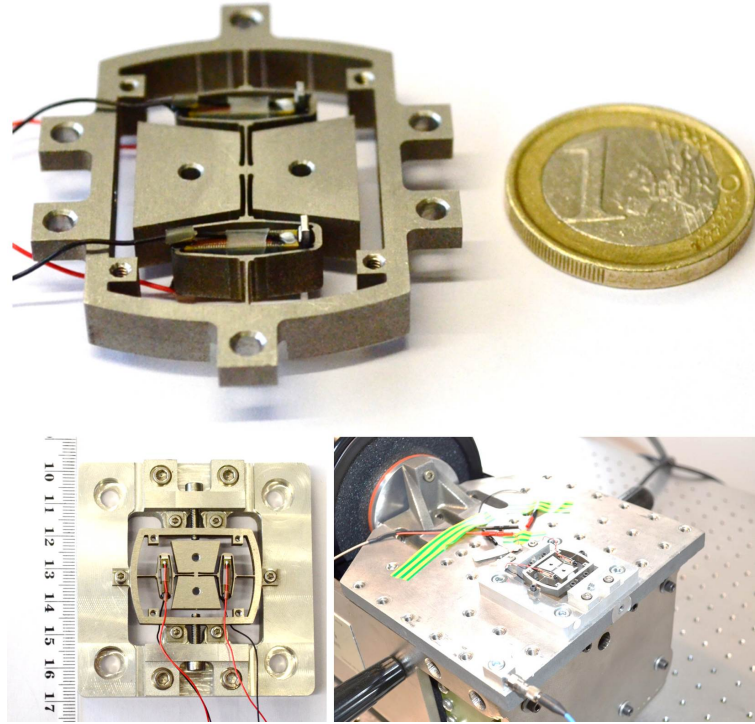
Fabricated mono-block generator and the assembly platform.
